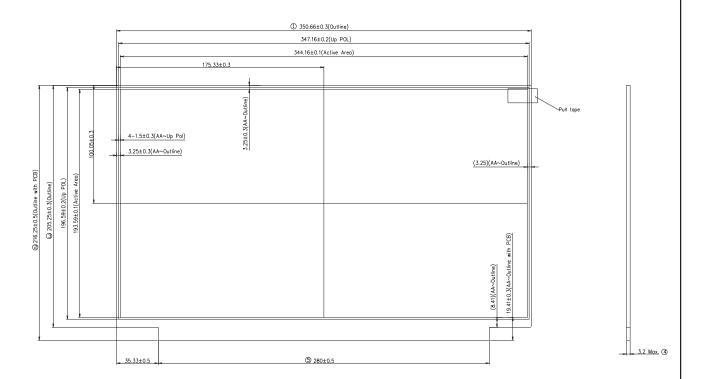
TFT-LCD Module Outline Dimension (Front View)
